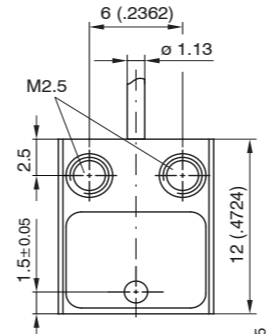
Dimensional drawing of sensor, dimensions in mm (inches, rounded off)
